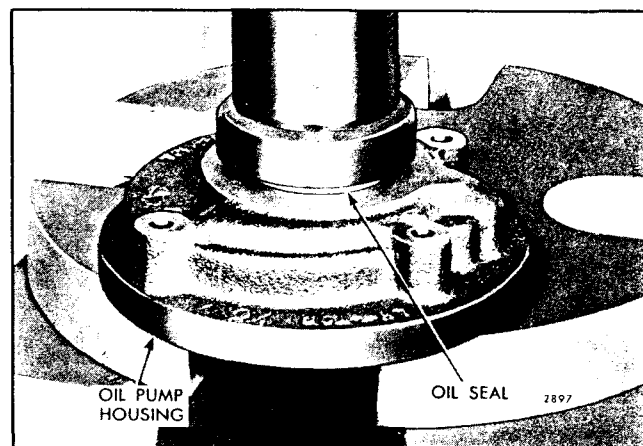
Installing Oil Seal in Oil Pump Housing
